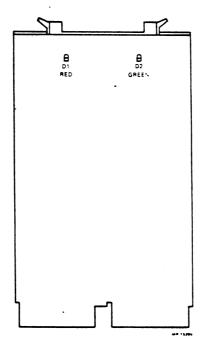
MINIMUM LOAD MODULE LAYOUT
